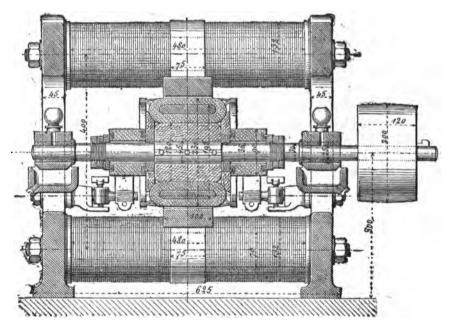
2000-Burner Machine (Longitudinal Section).
